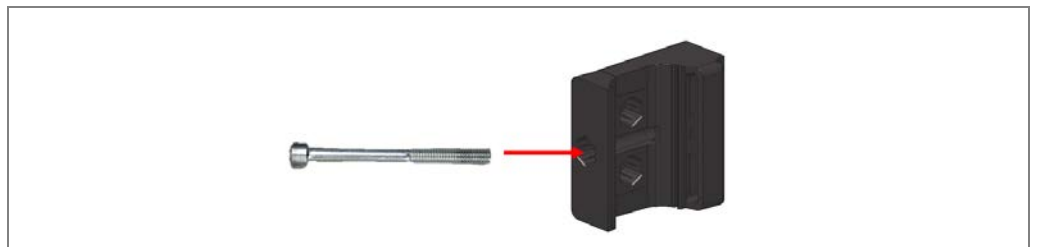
Steel frame: screwing together the QuickFix brackets for holding the MLG
